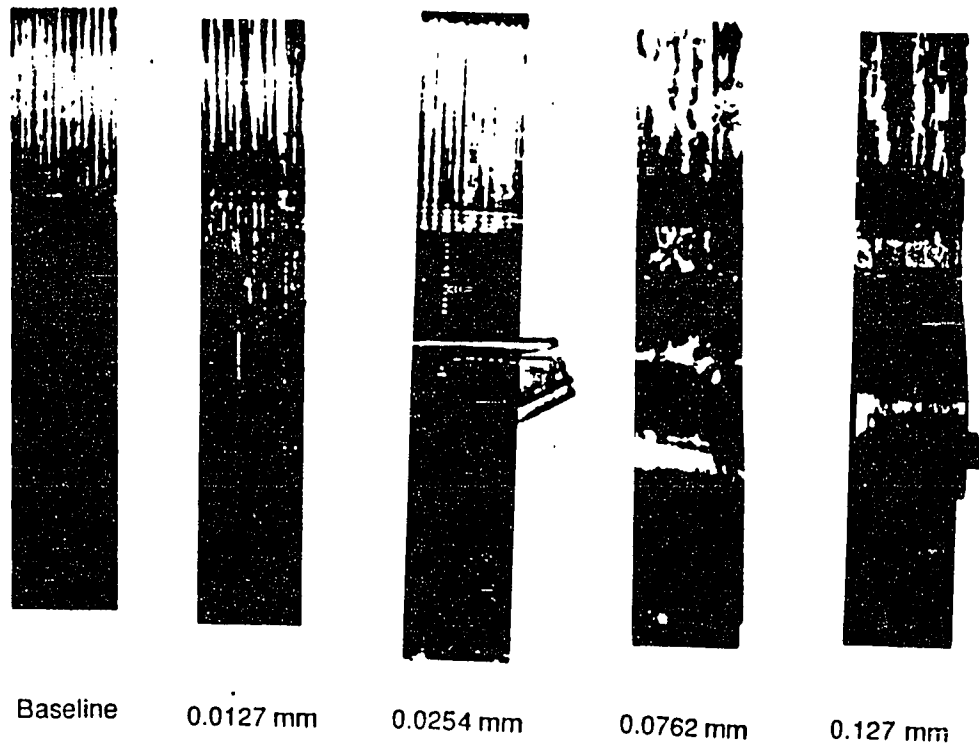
Fracture surfaces of film E interleaved specimens.
